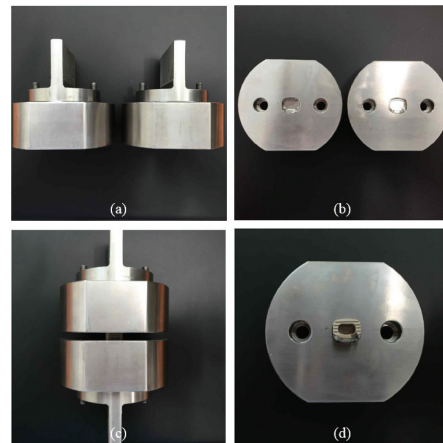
Pictures of test jig: (a) Jig blocks, (b) Upper and lower surfaces, (c) Frontal view of inserted specimen, (d) Specimen surface
